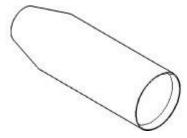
Crankshaft Seal Protector 6780-2 Courtesy of CHRYSLER LLC
